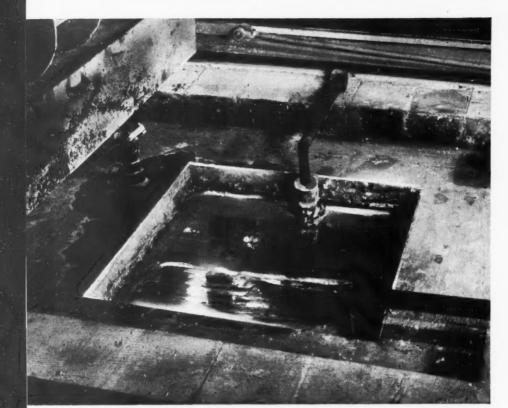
Molten aluminum to a depth of 2 to 4 inches floats on top of the salt bath for coating work-pieces to protect them from corrosion.
